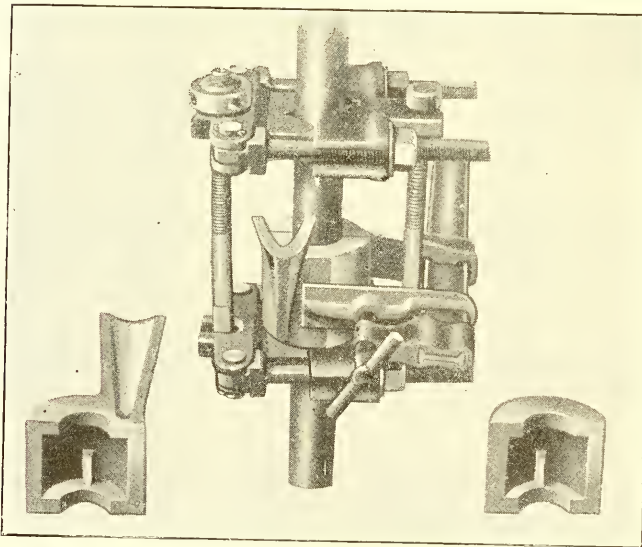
Mold for Welding Vertical Pipe.
